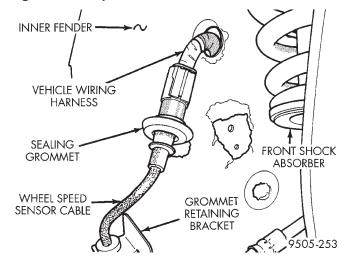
Wheel Speed Sensor Cable Connection To Vehicle Wiring Harness
